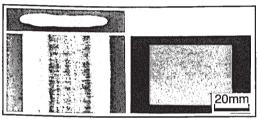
Outward appearance and macrostructure of thin slab fabricated by EM casting employing the spout with center-thinned cover shown in Fig.2
